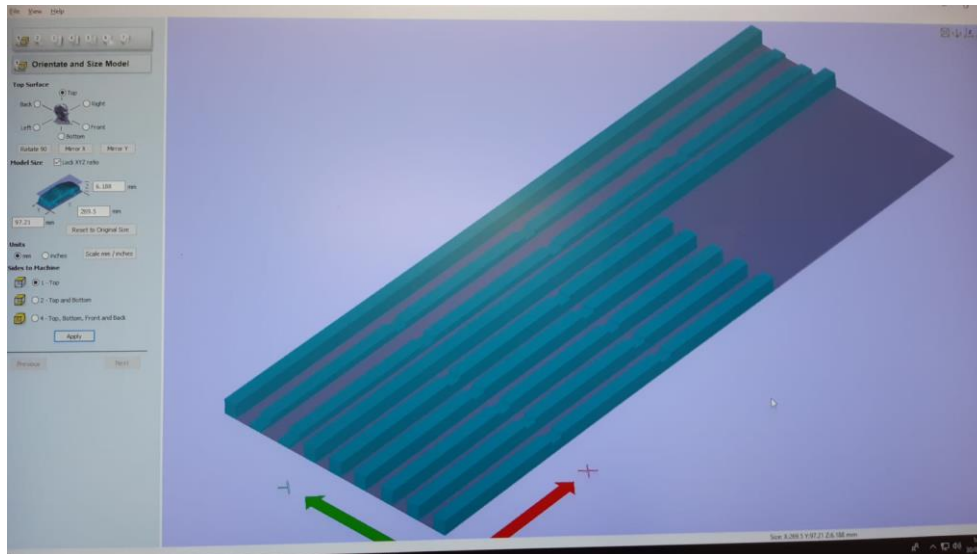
Parameters definition of the milling machine and visual inspection before fabrication, by authors, 2023. Copyright 2023 by oPEN Lab.
